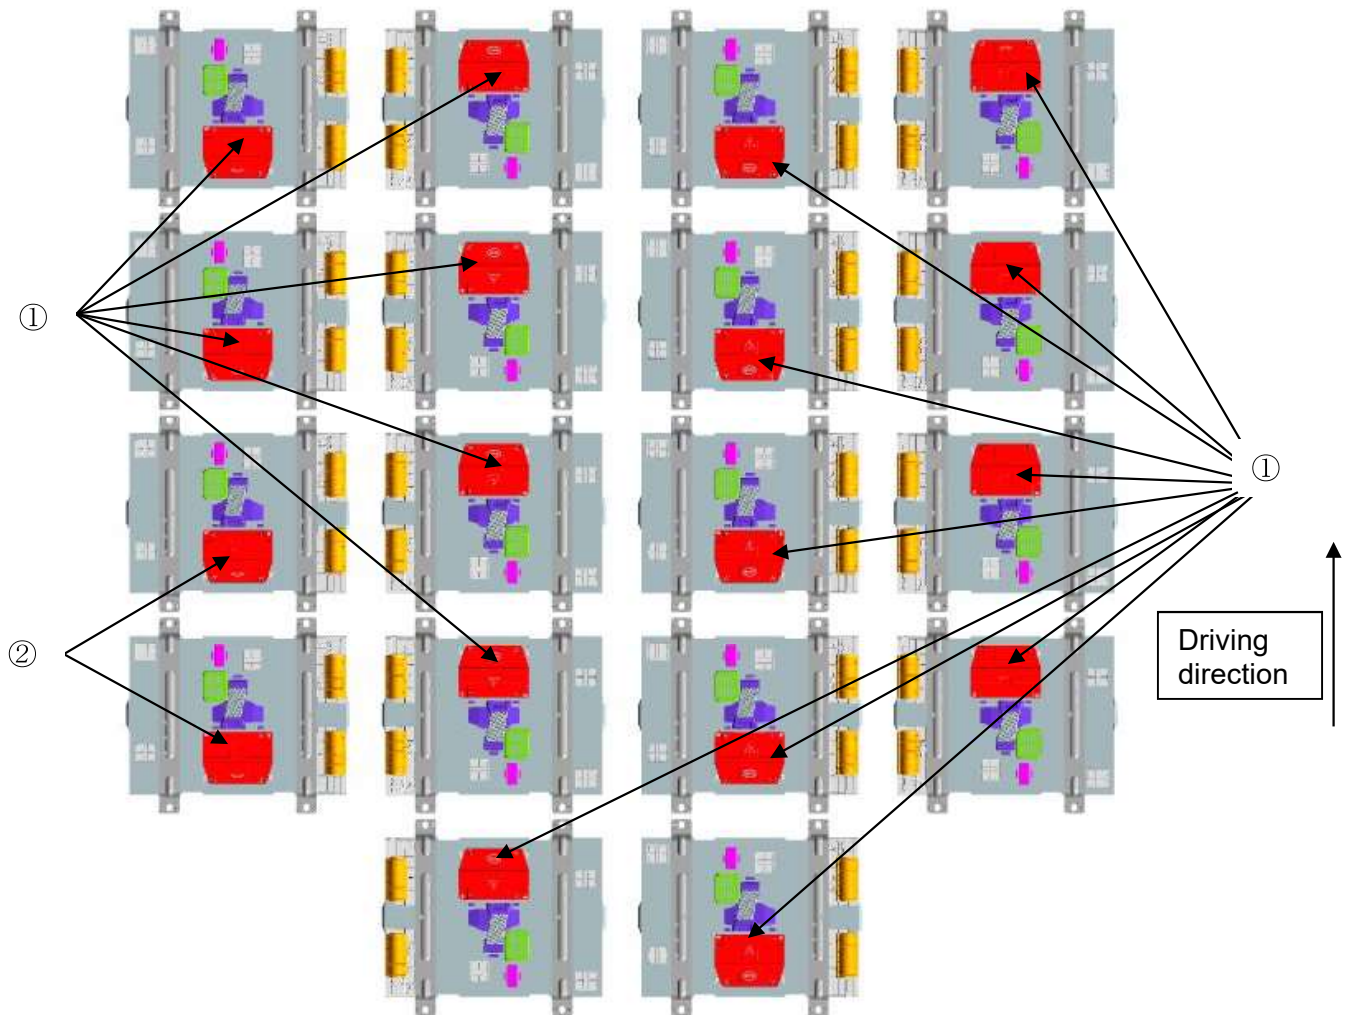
BMS Collector Layout (Roof Top Battery Pack)
